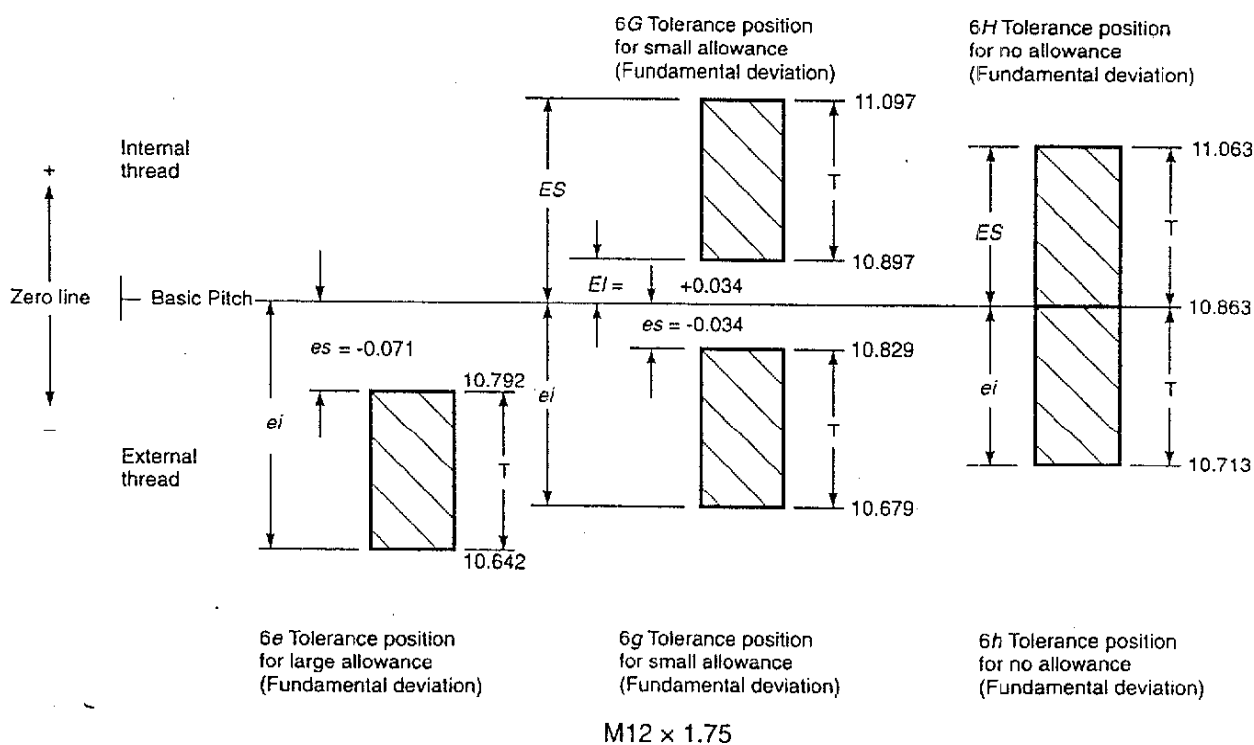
Metric Tolerance System for Screw Threads
